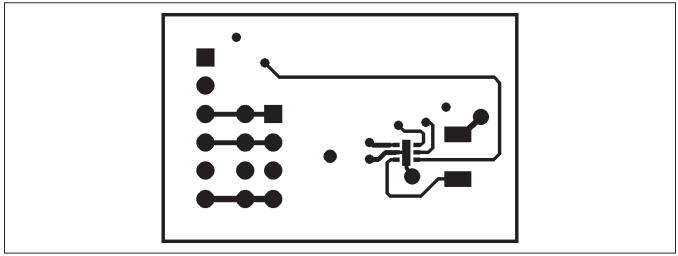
MAX44000PMB11 Peripheral Module PCB Layout—Component Side
